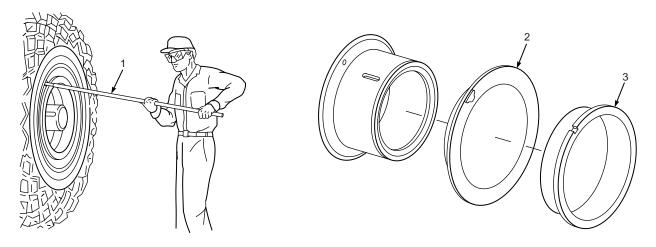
Working Outer Rim Flange Away From Bead Seat Band
